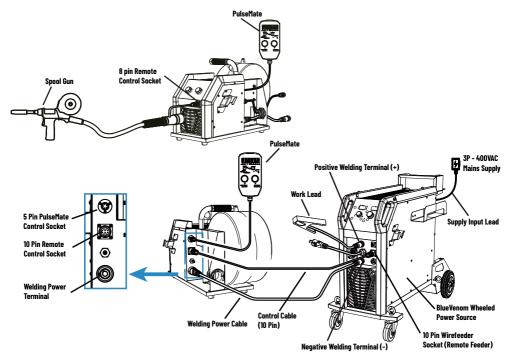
Setup with Spool Gun for Gasless MIG Wire
